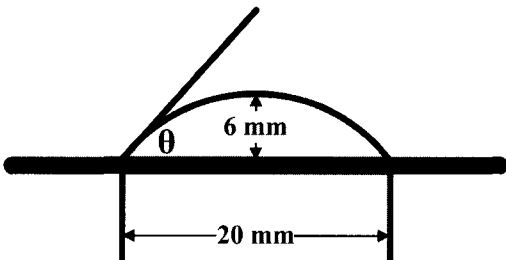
Butt welding detail with bead height of 6mm and welding leg of 20mm
